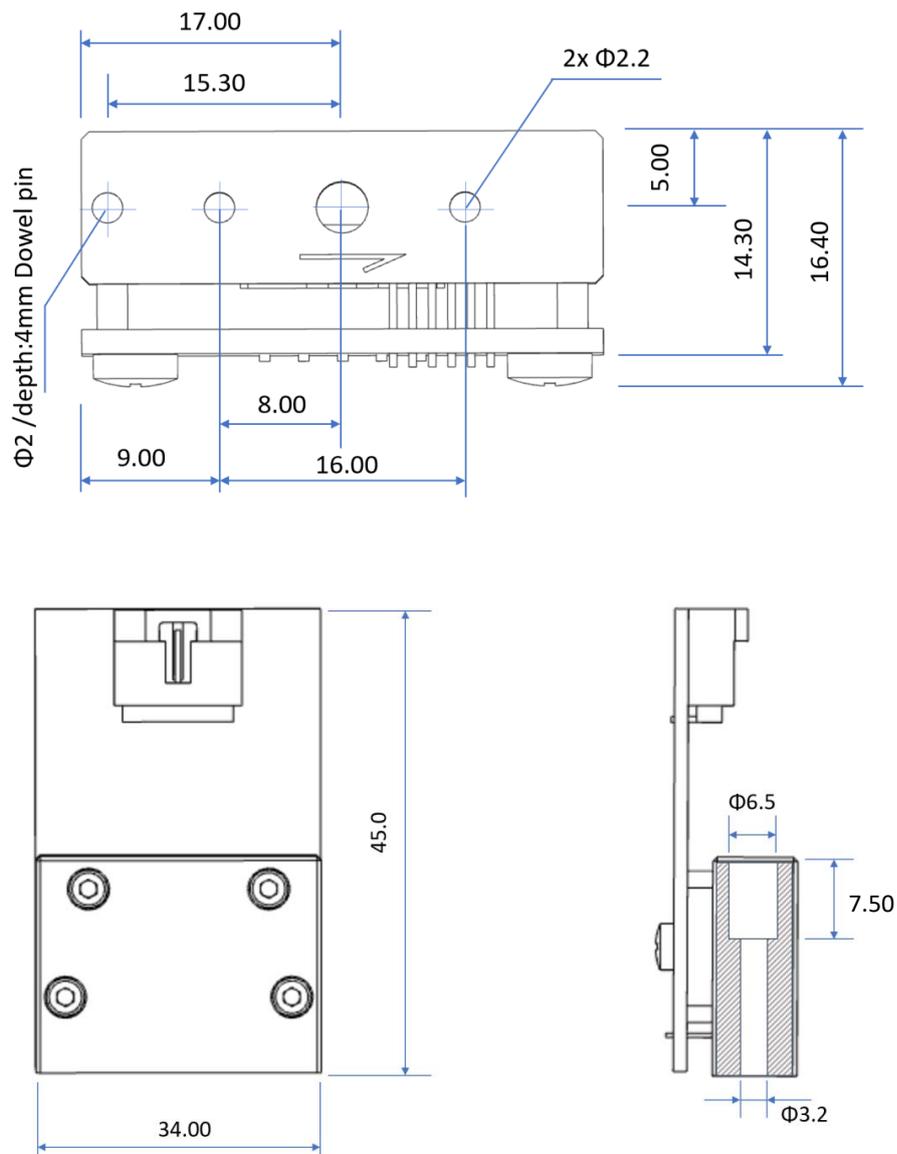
PFLOW5001 manifold mechanical dimensions.
